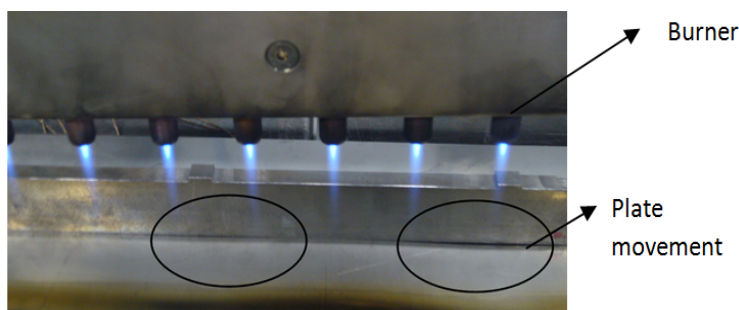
An example of plate movement during welding with additional heating beneath the burner in the clamped condition.
